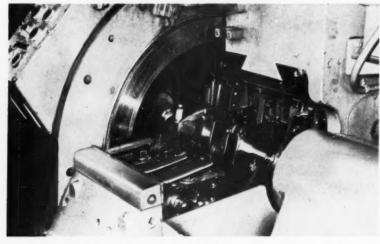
Set-up for rough turning crankshaft journals on a Wickes journal turner
